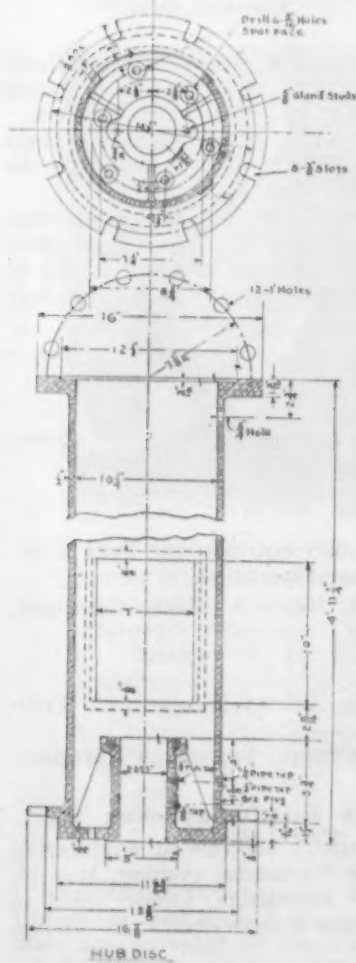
Dimensions of Hub Disc for 3 in. Slurry Pump
